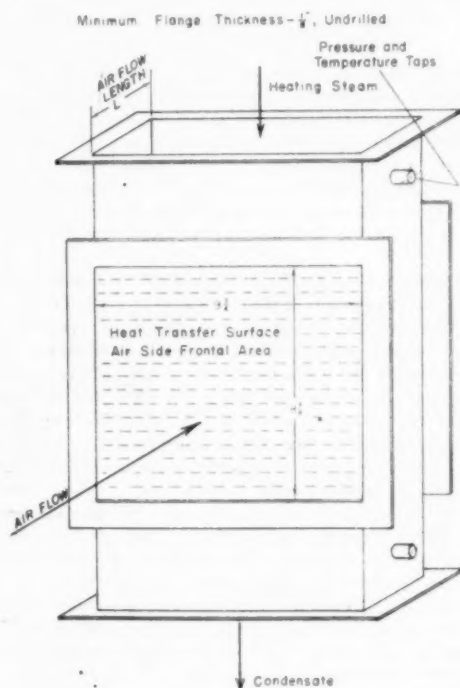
TEST-CORE OUTLINE DIMENSIONS
